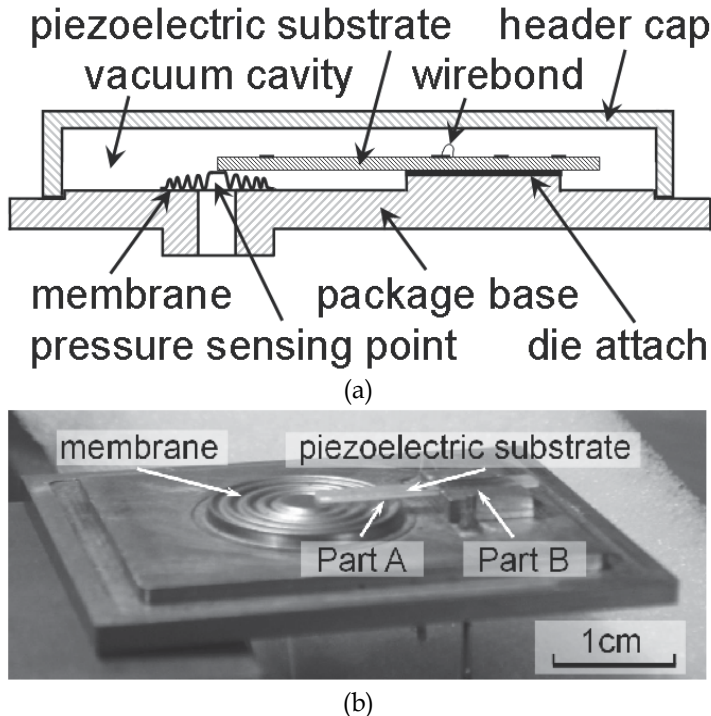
(a) Schematic diagram of a completely packaged sensor, and (b) photograph of a real microsensor without the packaging header cap
